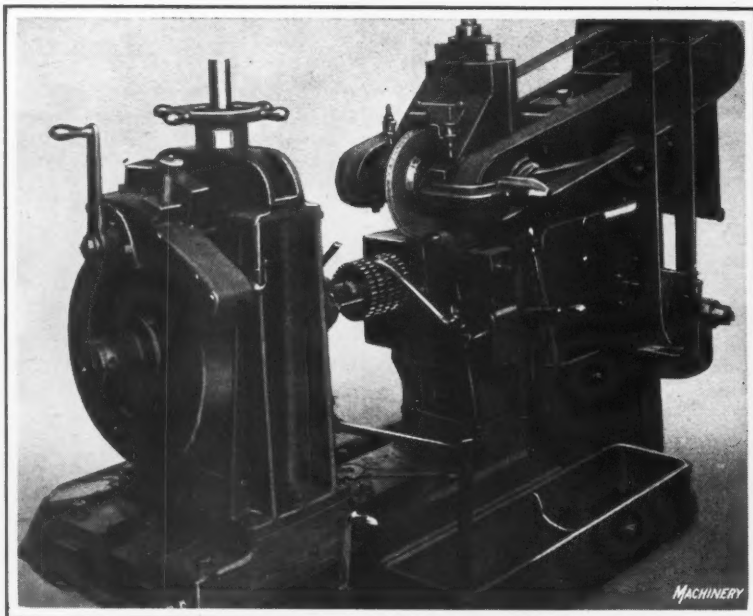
Grinding Five Gears simultaneously on Formed-wheel Type of Gear Tooth Grinder
